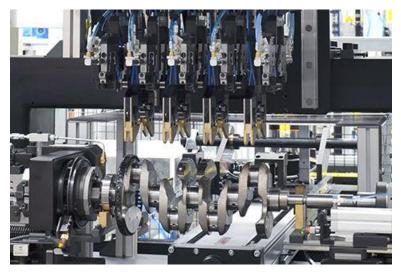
FULLY AUTOMATED CRANKSHAFT MACHINESFULLY AUTOMATED CRANKSHAFT MACHINES
